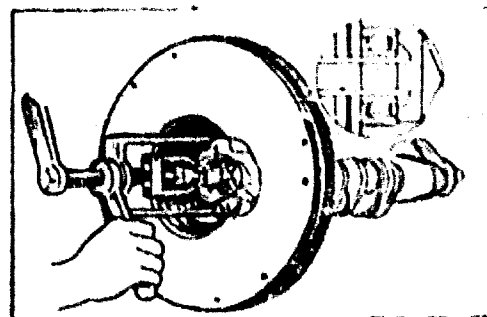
Pulling the transmission drive shaft bearing with a crank puller
